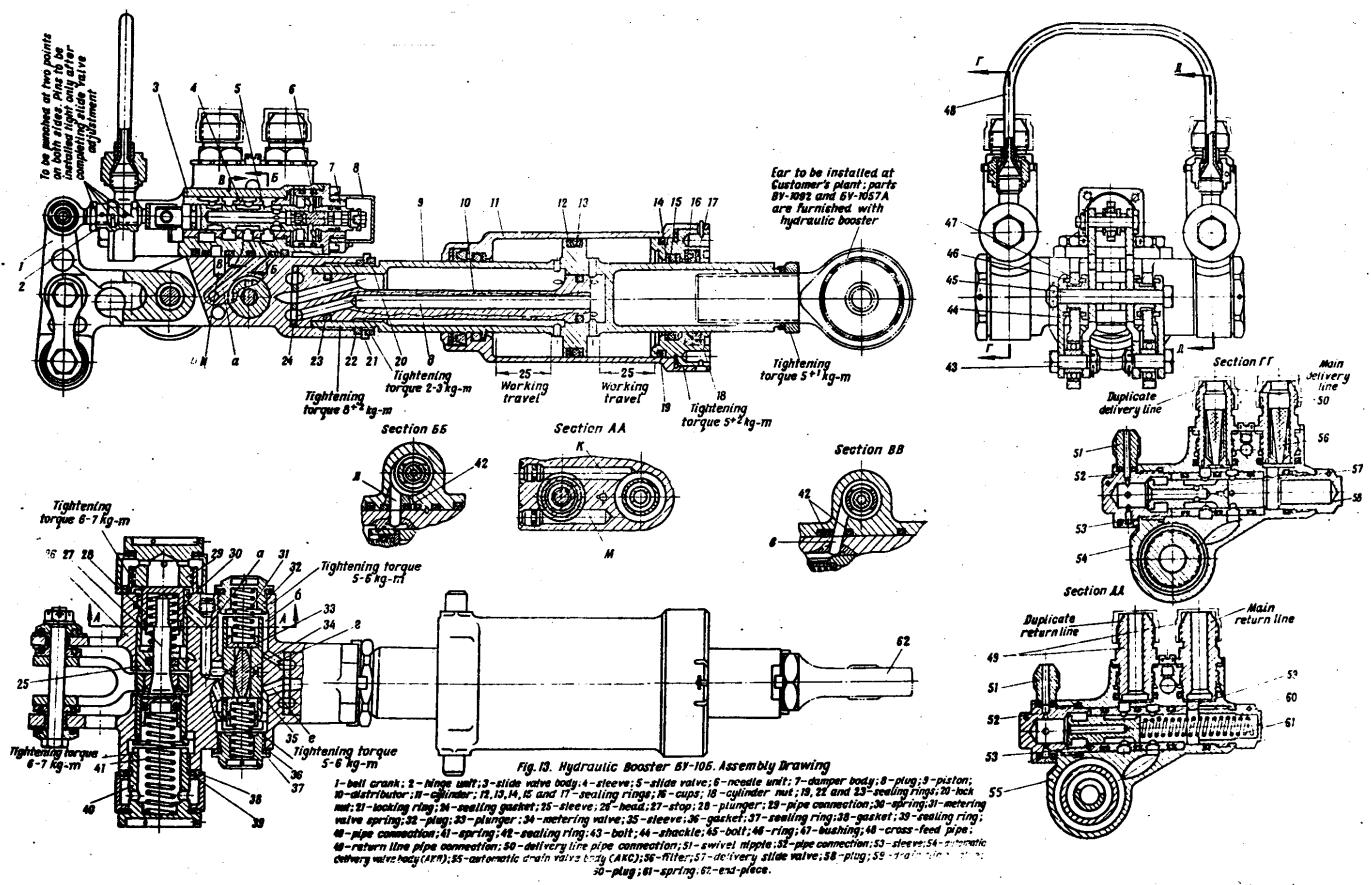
Hydraulic Booster 6Y-106 Assembly Drawing
